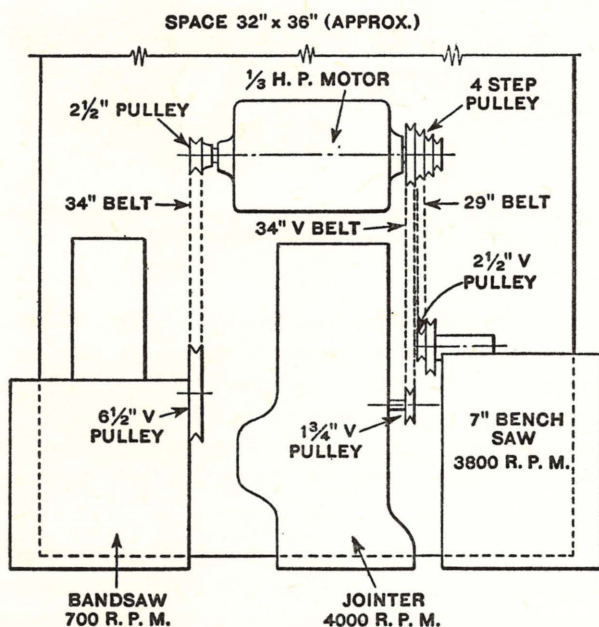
Layout for motor, bandsaw, jointer and circular saw
